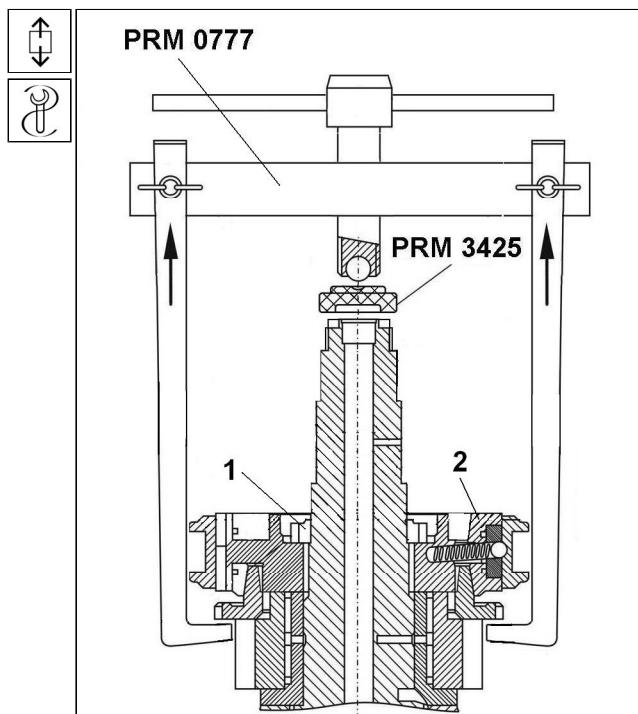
Removal of the 4th-5th gear synchromesh
